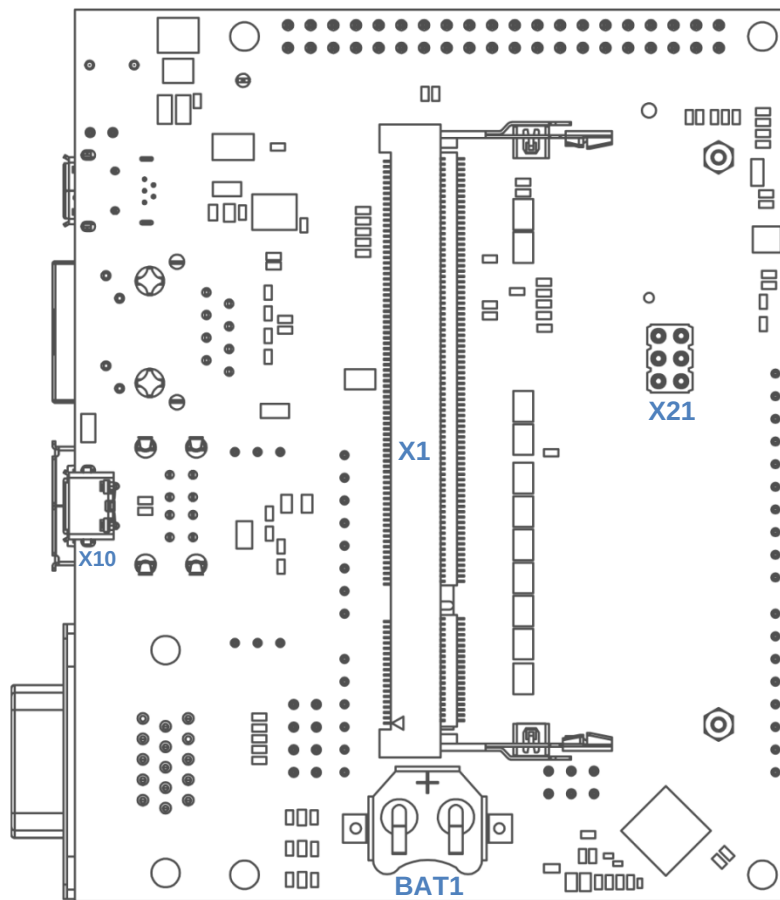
Aster Carrier Board Connectors – Bottom Side
